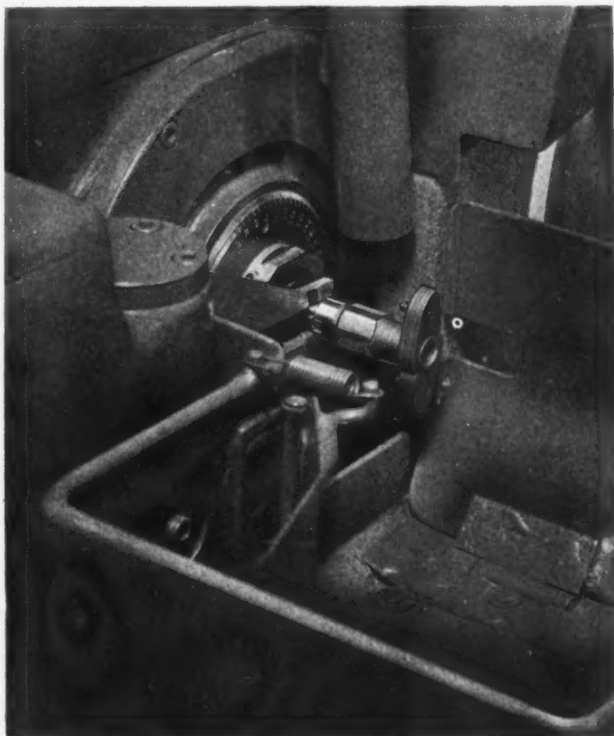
Grinding Airplane-engine Distributor Cams on a Plain Hydraulic Machine Equipped with Cam-grinding Attachment
